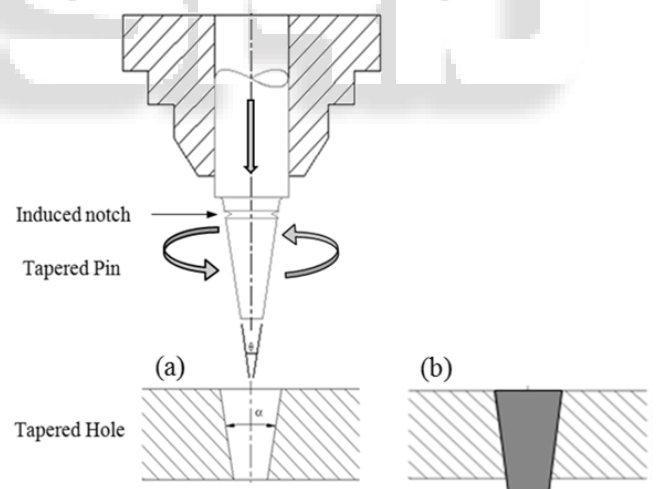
Schematic drawing of FHW process before ^(a) and after ^(b) welding
